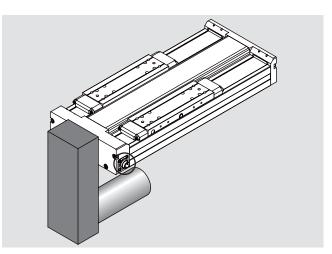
screw drive with lateral motor mount at right hand side (Mounting condition 04)
